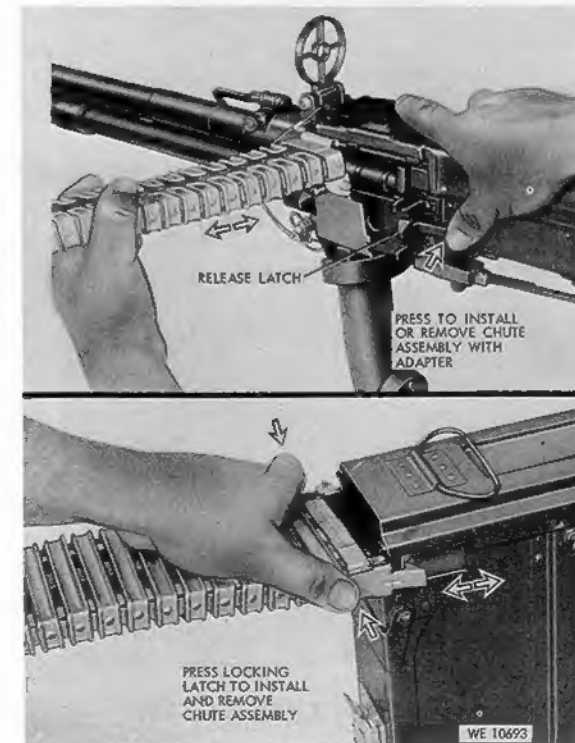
Removal or installation of the chute assembly—subsystem XM23.
